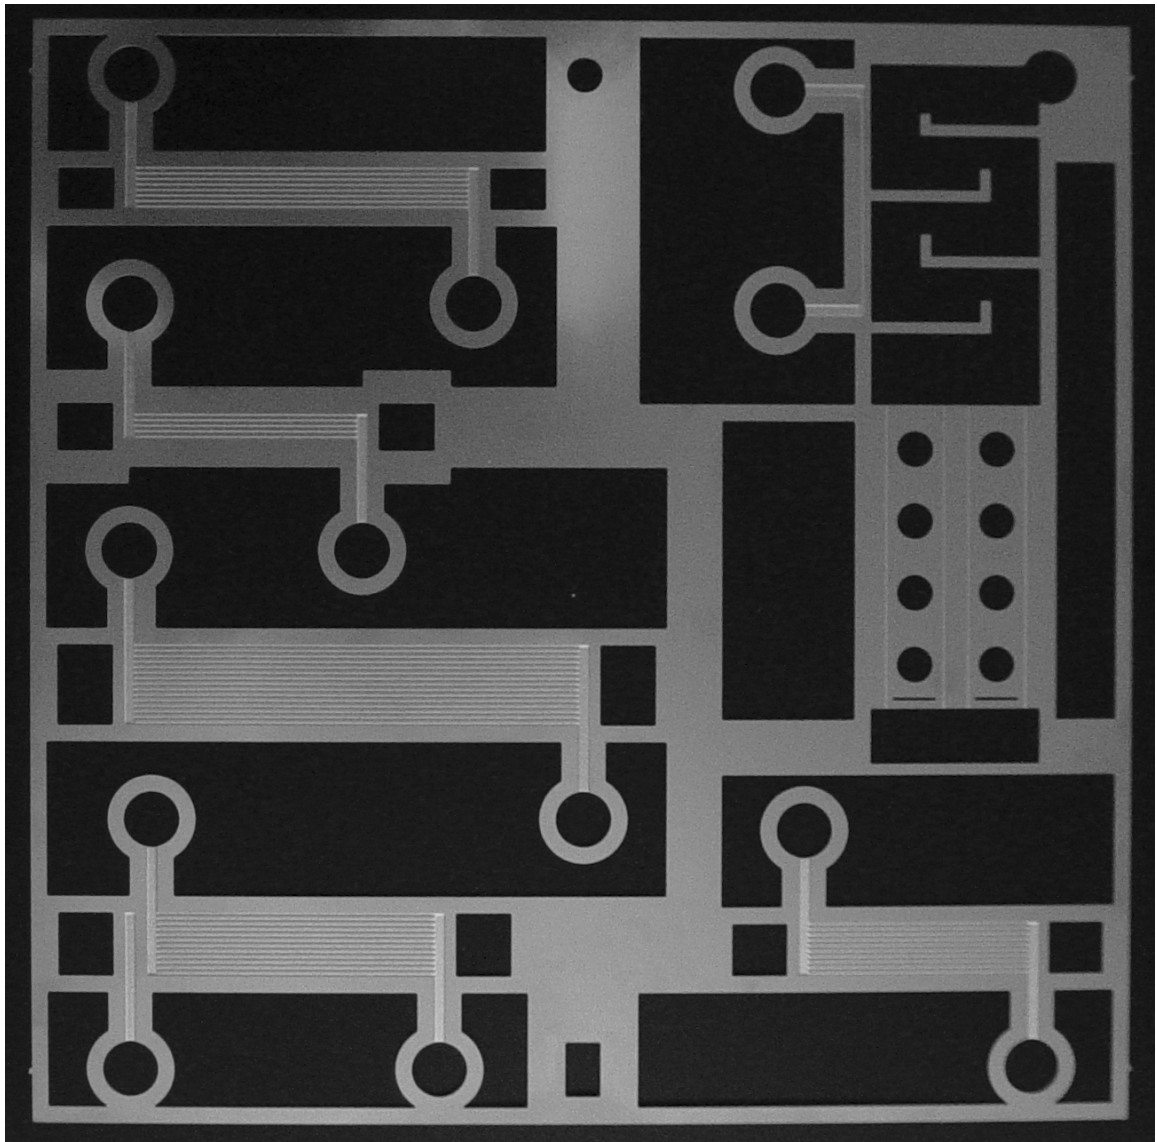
Photograph of Shim B after being removed from tabbed sheet
